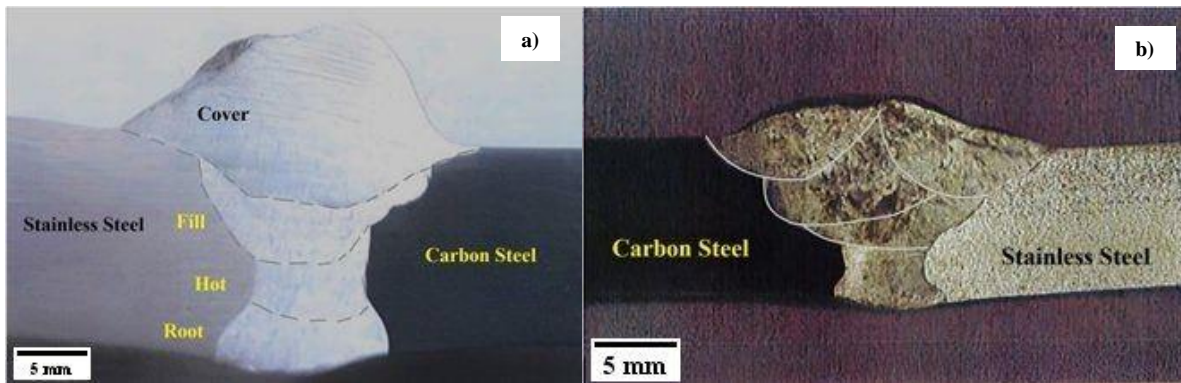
Macro images of a) W-309 coded welding process and b) W-INC coded welding process
